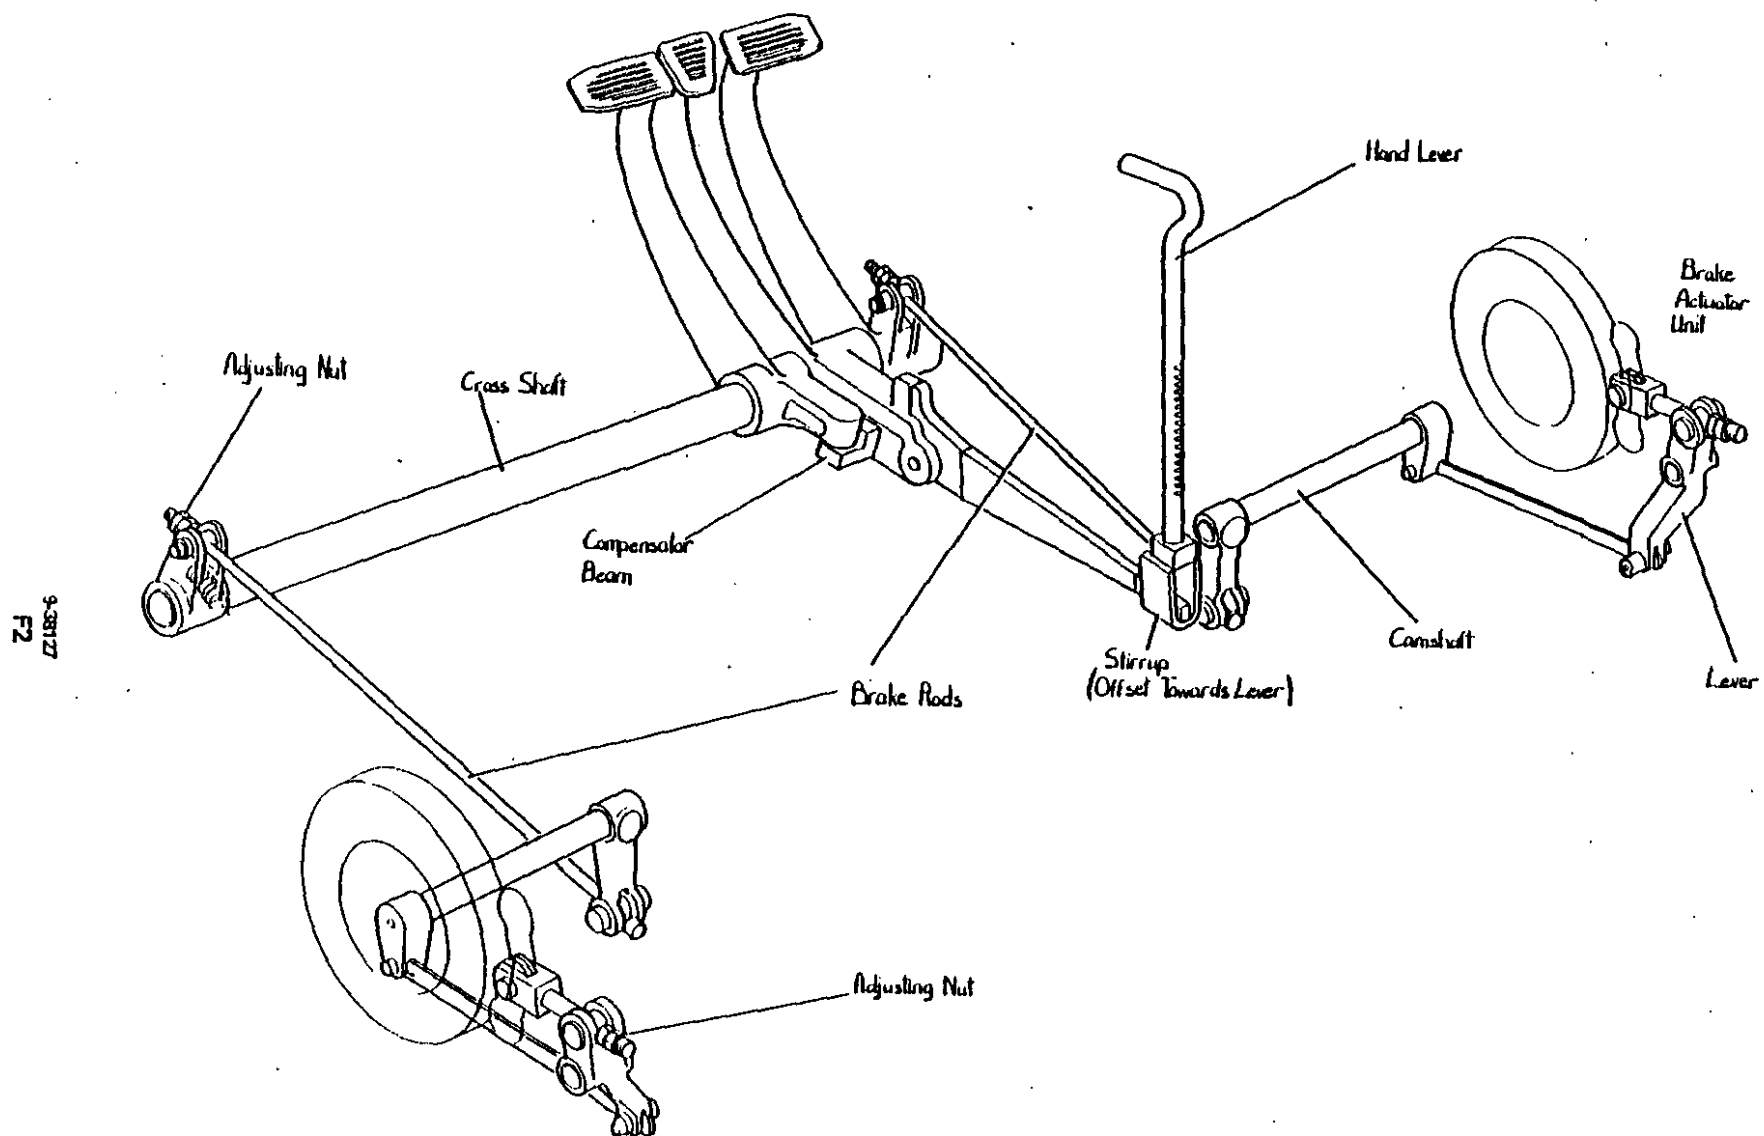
ARRANGEMENT OF BRAKE MECHANISM
